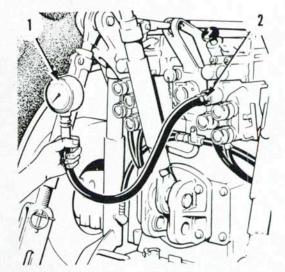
To check system relief valve opening pressure, connect a 0-5000 psi (0-35000 kPa) pressure gage (1) to "Raise" outlet of remote control valve (2). Refer to text.
